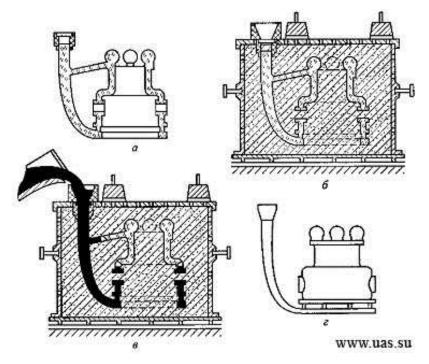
Scheme of the lost-foam casting production: a – polystyrene foam casting model;  $\delta$  – a mold prepared for casting; B – mold casting, gasification of the model;  $\Gamma$  – casting with elements of the pouring gate system
